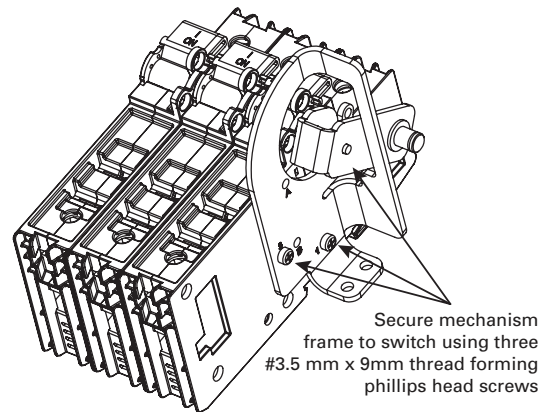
Secure mechanism frame to switch using three 3.5 mm x 9 mm thread forming phillips head screws in holes marked 1, 2 and 3.
